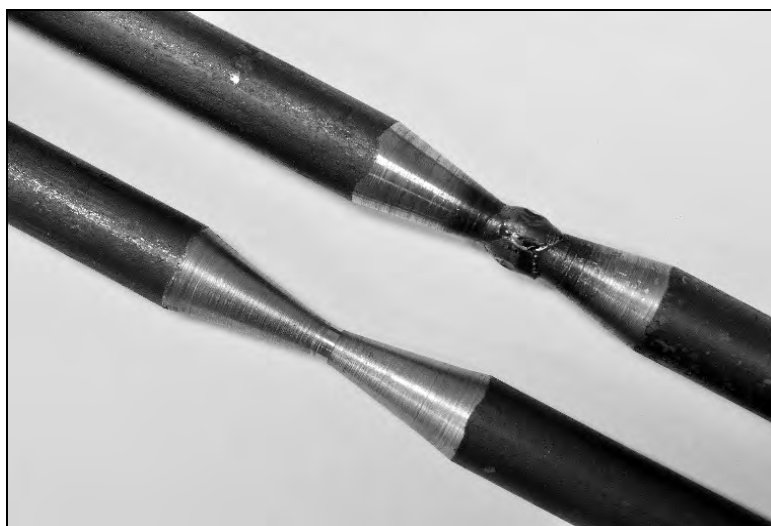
Test specimens #3 and #4 - rotationally symmetric double U butt welded joint and massive element without welding
